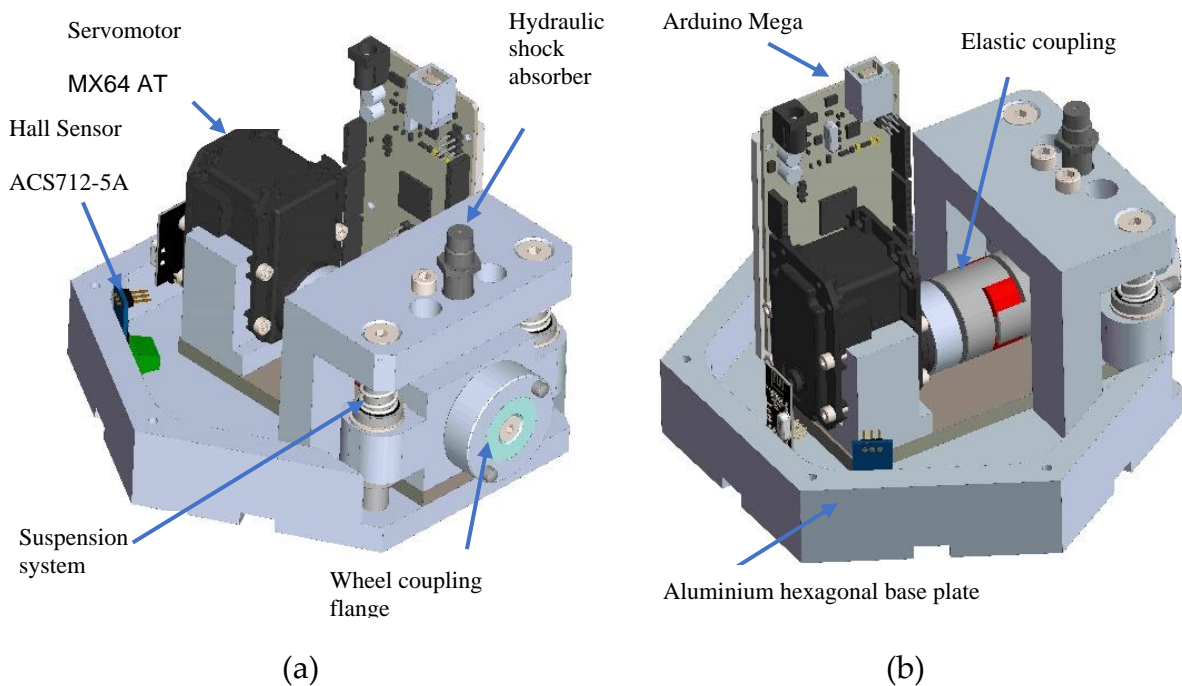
Drive wheel module (3D model): (a) exterior view; (b) interior view.
